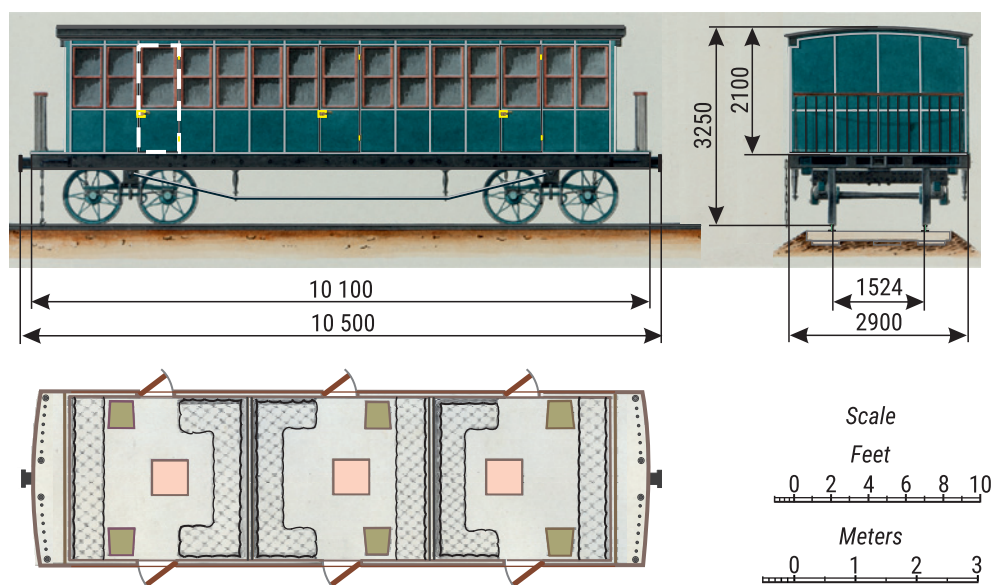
Small first-class coach with separate compartments with doors for each compartment opening outwards. The St. Petersburg – Moscow Railway, 1851. For clarity, the figure outlines the outer door of the left compartment with a dotted line [13]
